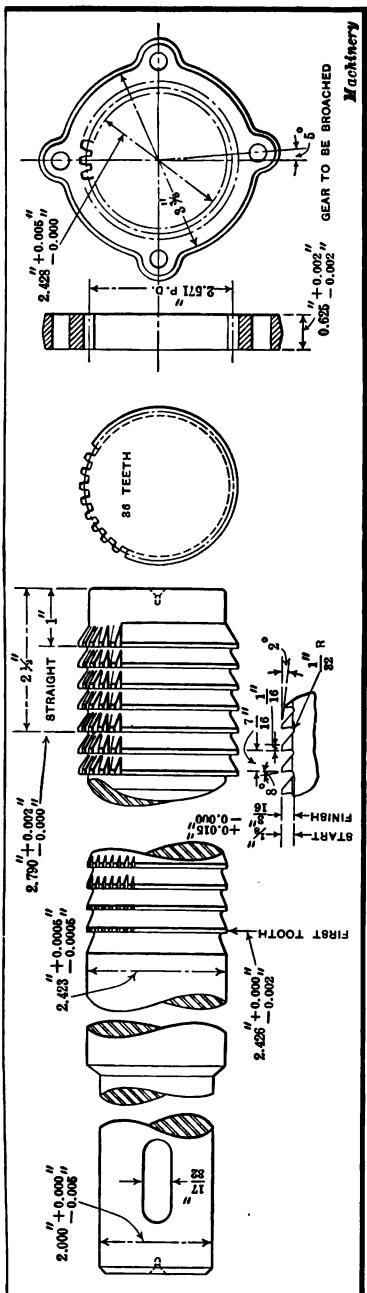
Steering Gear and Broach used for cutting the Internal Teeth at a Single Operation
